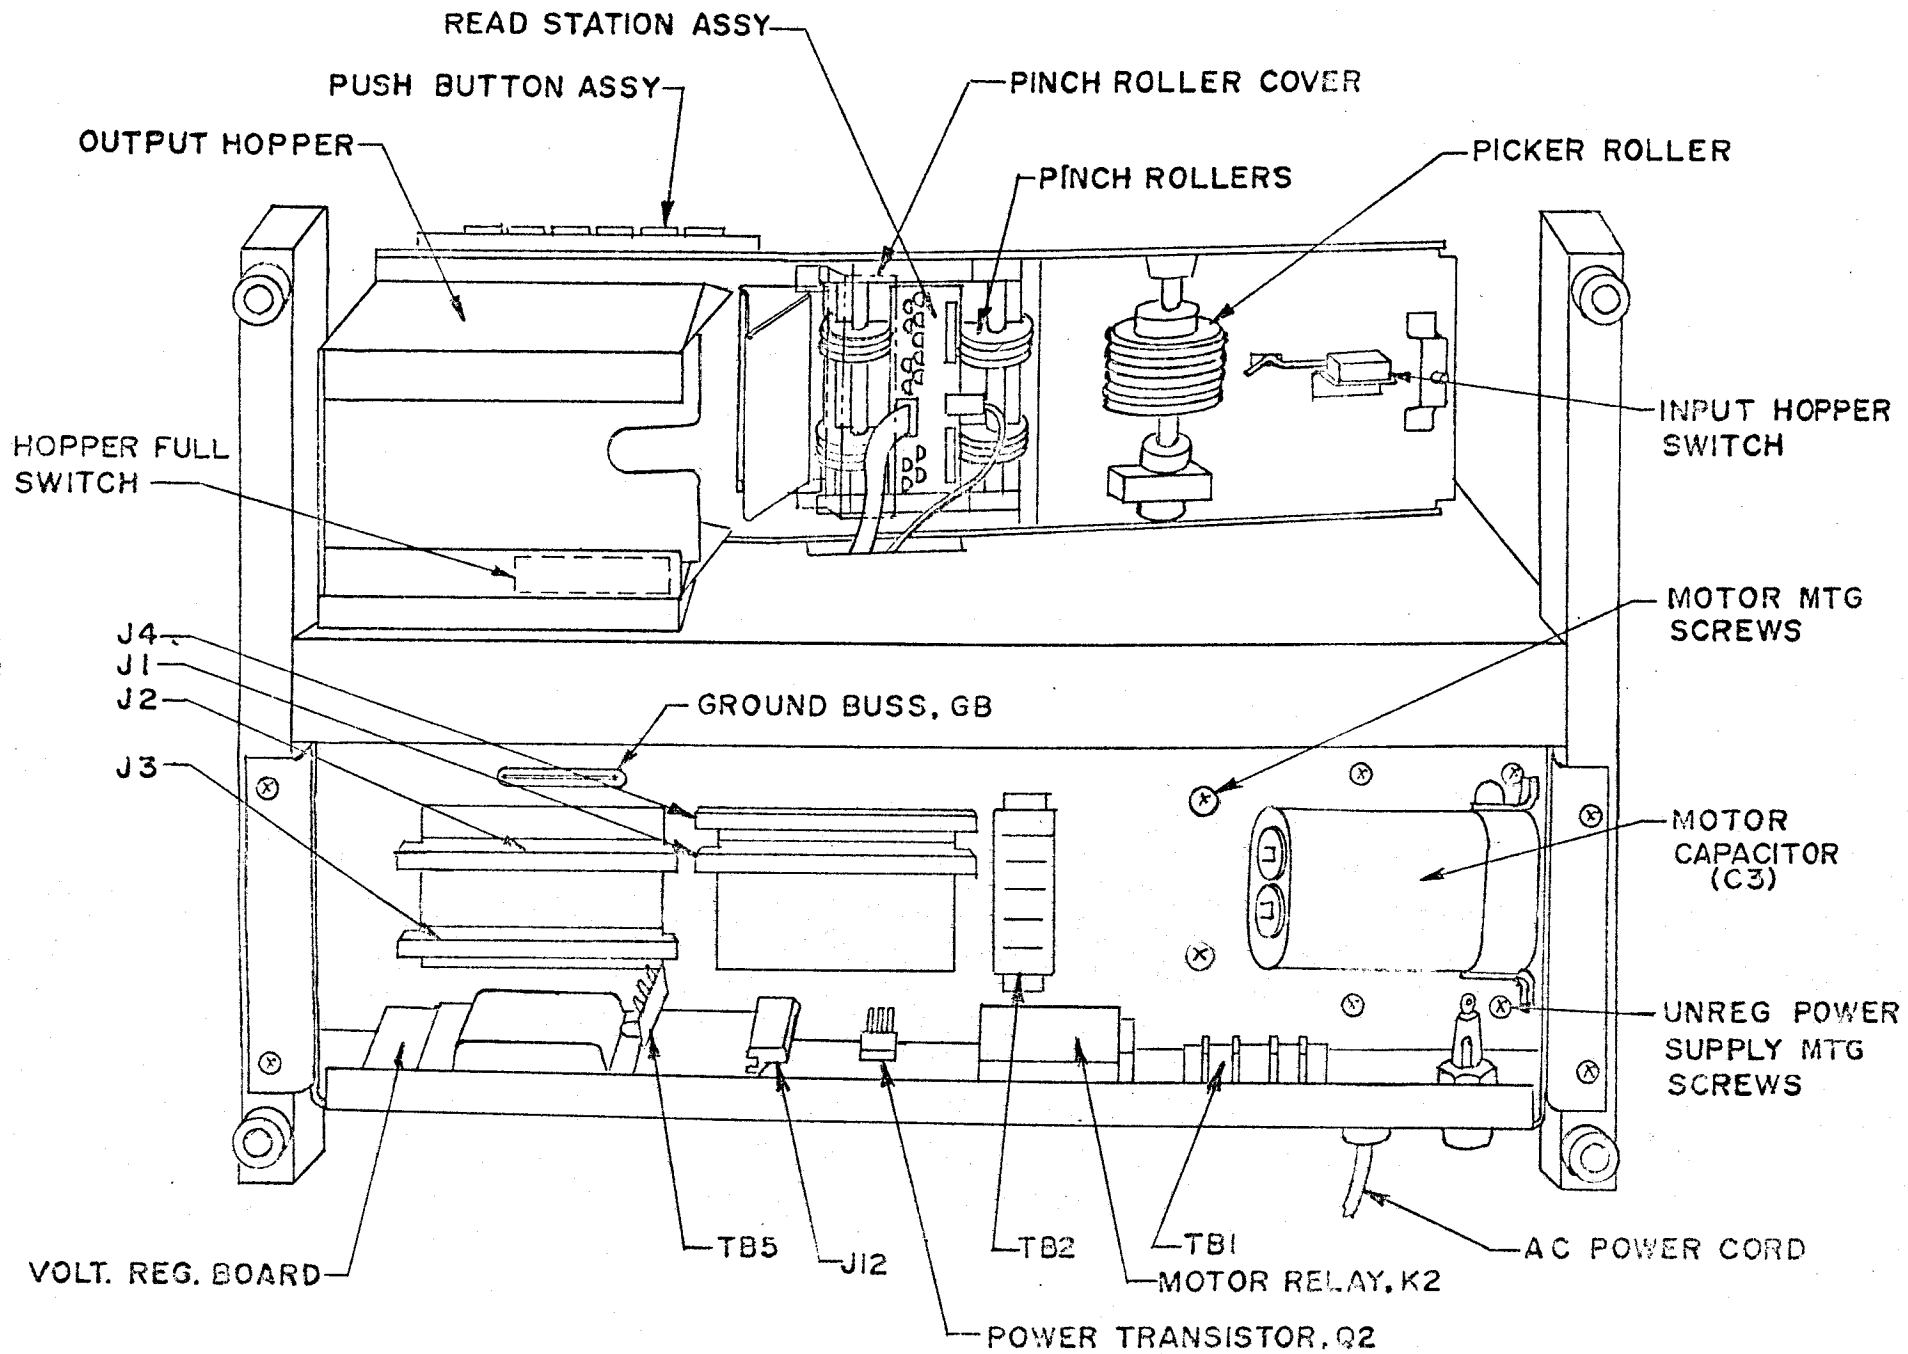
, BOTTOM VIEW OF CARD READER, FRONT COVER REMOVED
